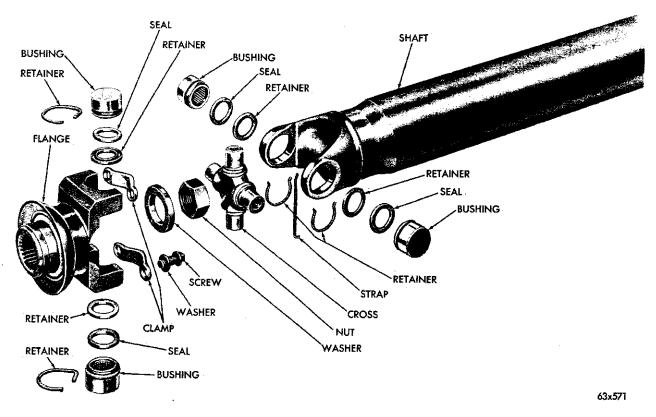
Cross and Roller Universal Joint (Disassembled View)
